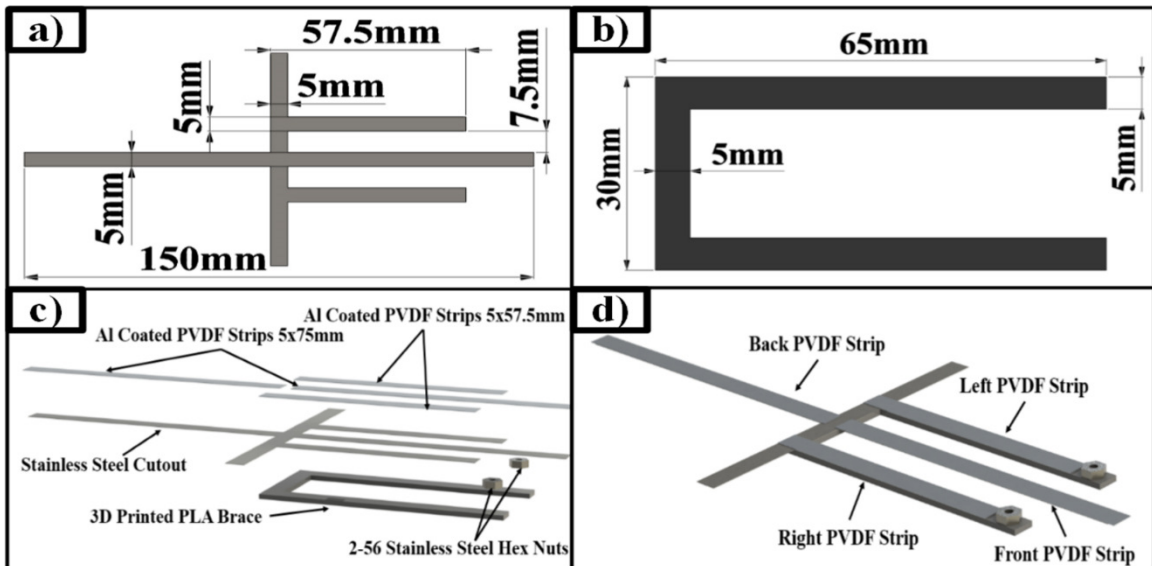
a) Stainless steel cutout dimensions, b) PLA planar dimensions, c) assembly exploded view, d) assembly collapsed view and associated PVDF beam section labeling scheme.
